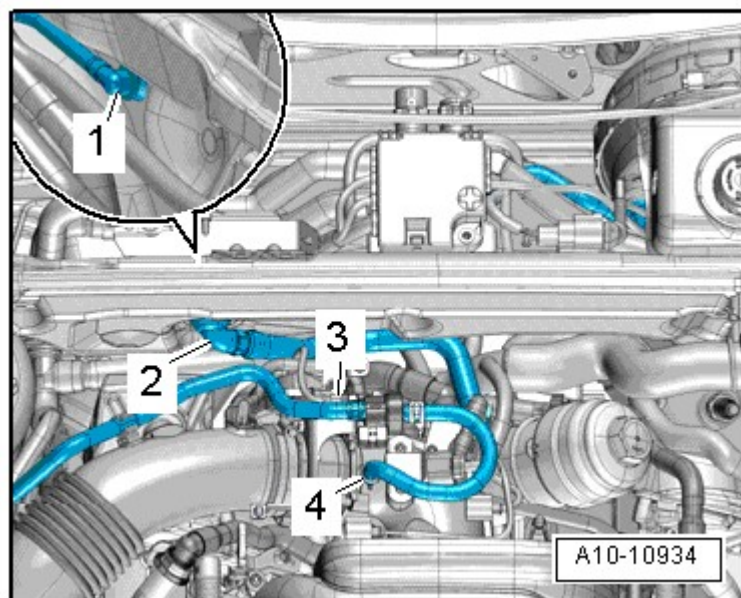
Removing Vacuum Connection -2- From Bulkhead By Pulling Vacuum Hose -1-
